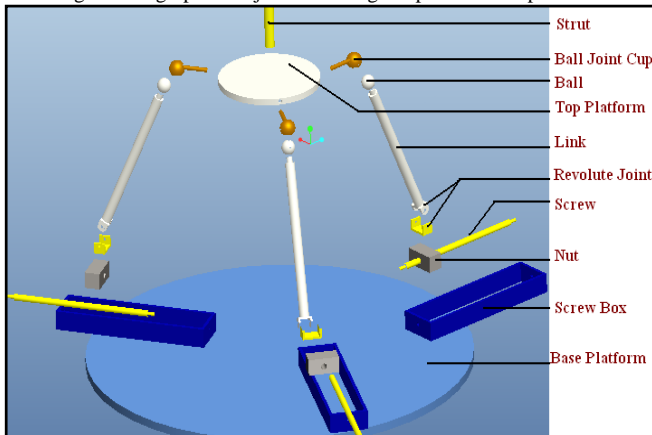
(a) CAD Exploded view of tri-glide parallel manipulator
